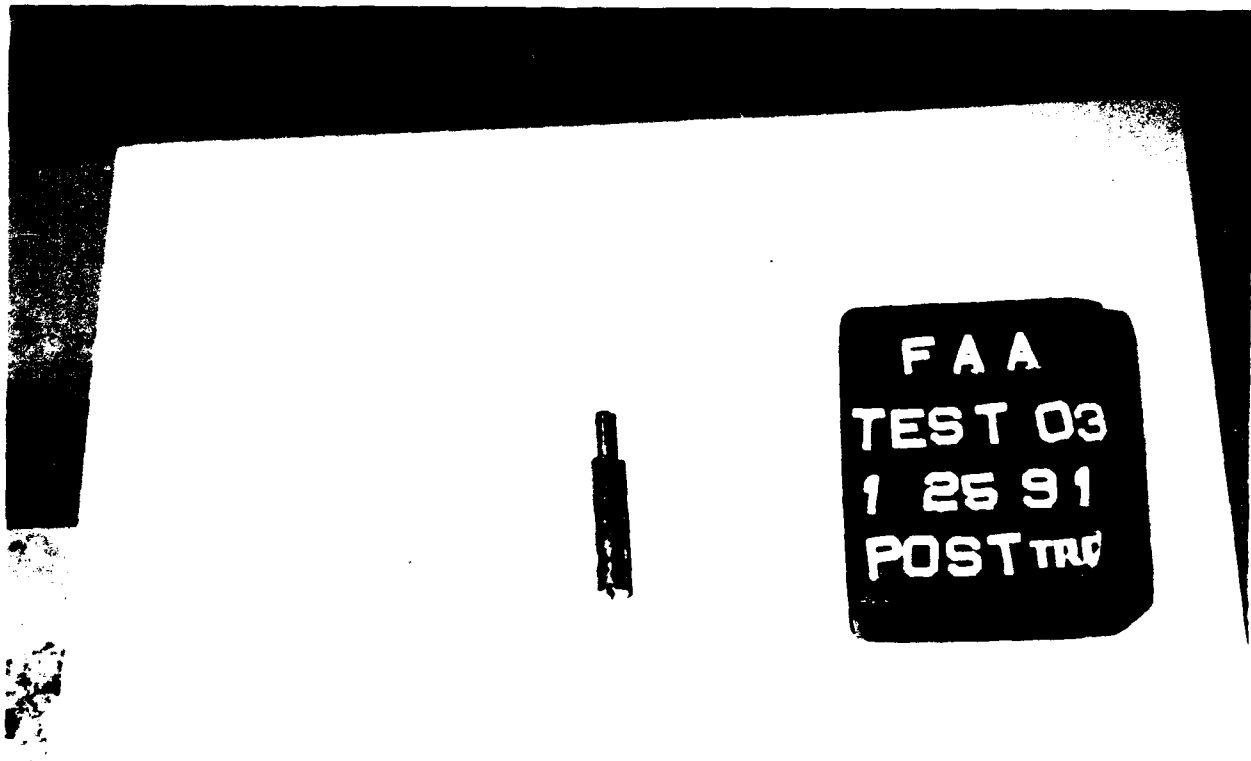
POST-TEST BIN 'A' REAR SUPPORT BAR SHEAR PIN, REMOVED
